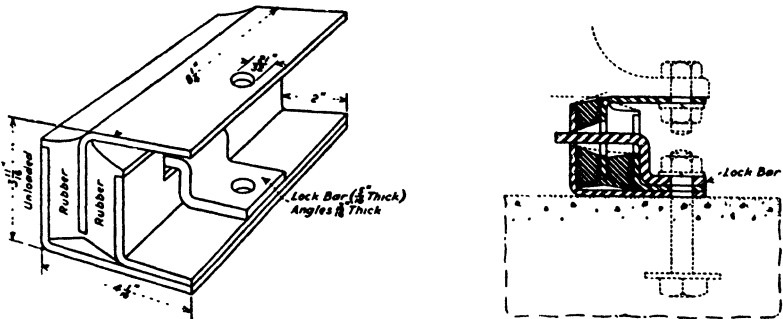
MACHINE MOUNTING USING RUBBER IN SHEAR
